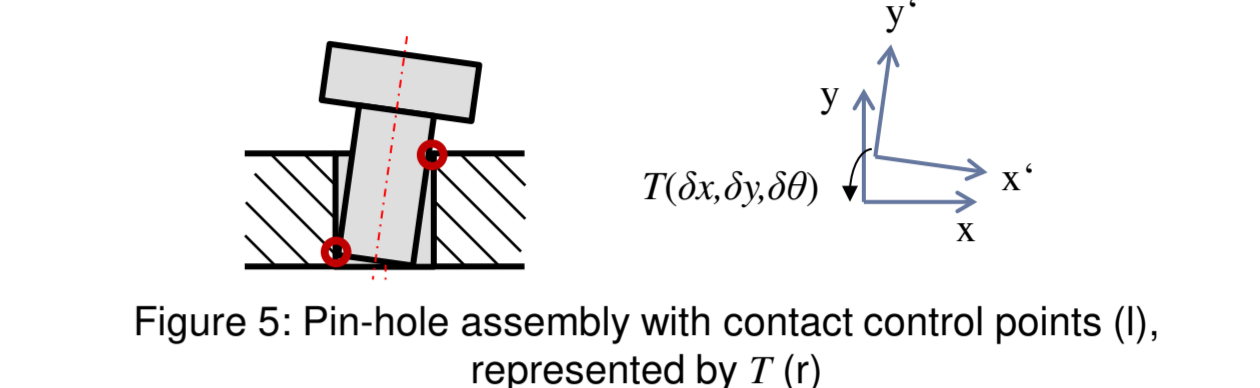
Pin-hole assembly with contact control points (l), represented by $T(r)$
